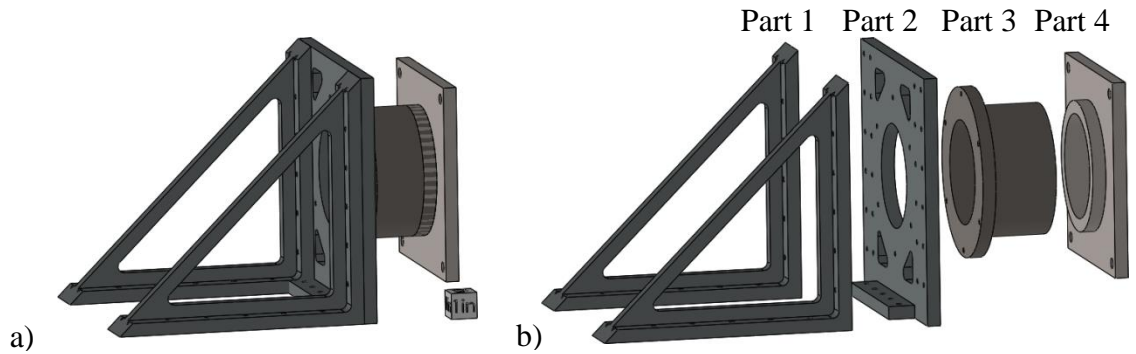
Example aircraft-like assembly, a) assembled view, b) exploded view (1 inch block included for reference)
